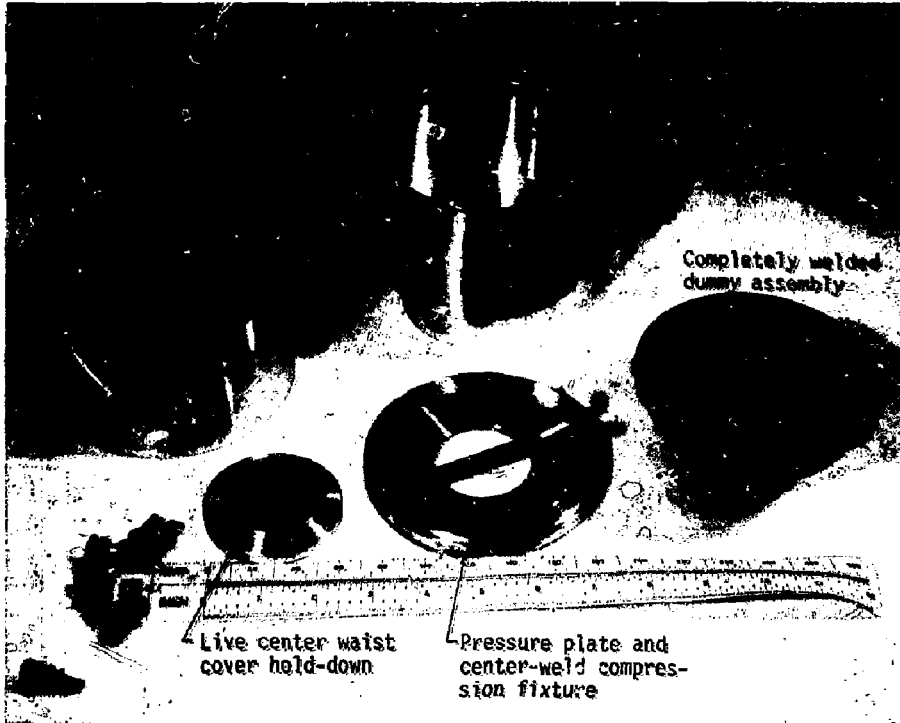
Components of the fixture used in welding the can for the hollow hemisphere.
